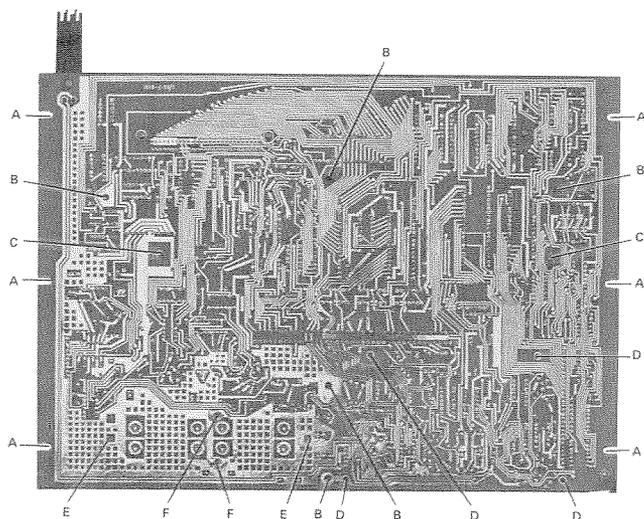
Locations of screws on the main board, bottom view. Screws at A and B hold the board to the chassis. Screws at C hold brackets for display board; D, the keyboard module; E and F, the test fixture guide block. All except F are accessed from this side.
